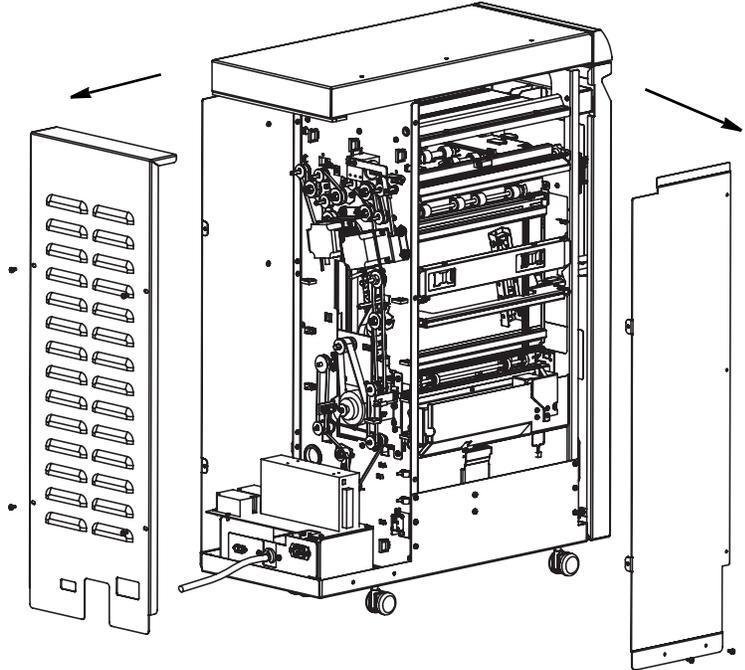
Rear Cover & Rear Entrance Side Cover Removal
